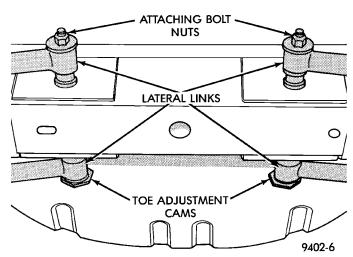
Torquing Rear Lateral Link Attaching Bolts
